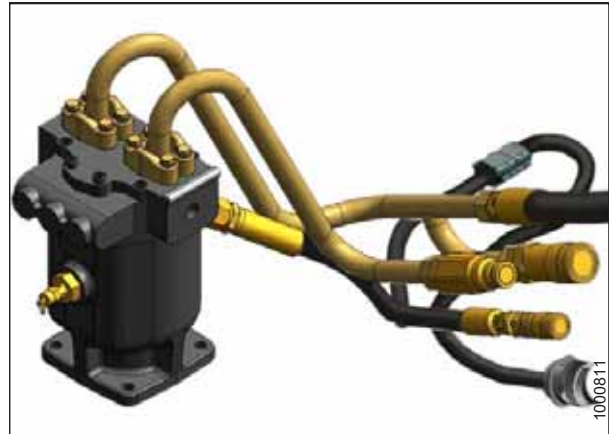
M155 Hydraulic Drive Kit (MD #B5510)
